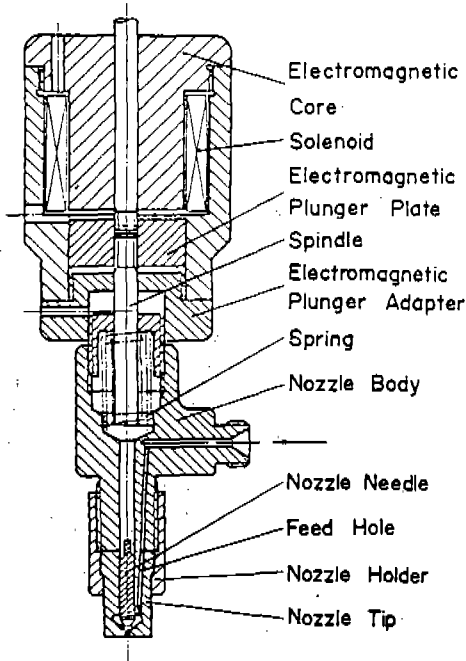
Sectional Drawing of Modified Spray Nozzle
